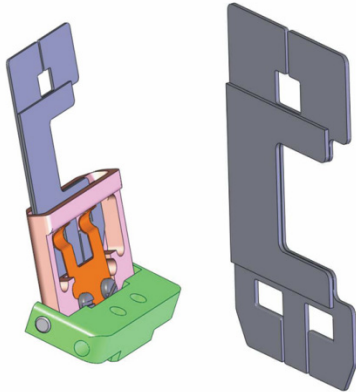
Stripper foil mounting frame (right) and frame holder that attaches to chain.
